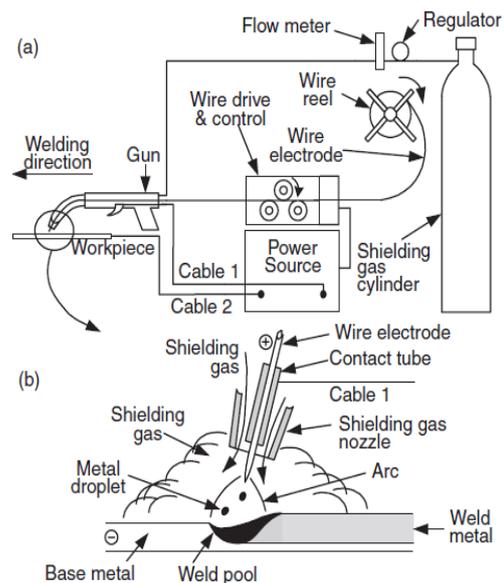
Gas–metal arc welding: (a) overall process; (b) welding area enlarged.
